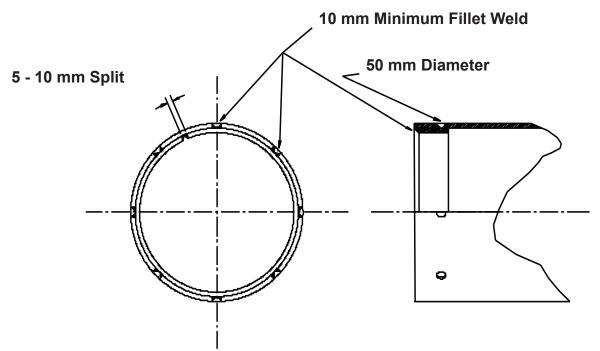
Straight Drive Shoe with Plug Welded Casing Holes
